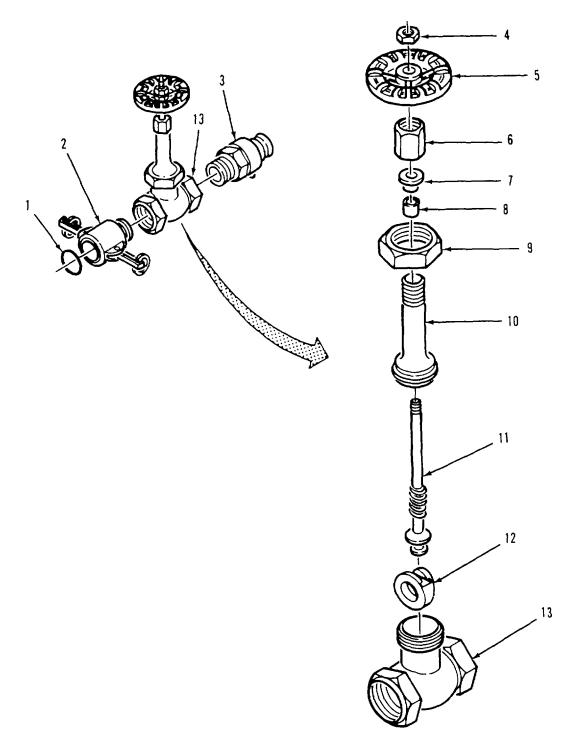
Gate Valve Assembly (2-inch) Repair.
